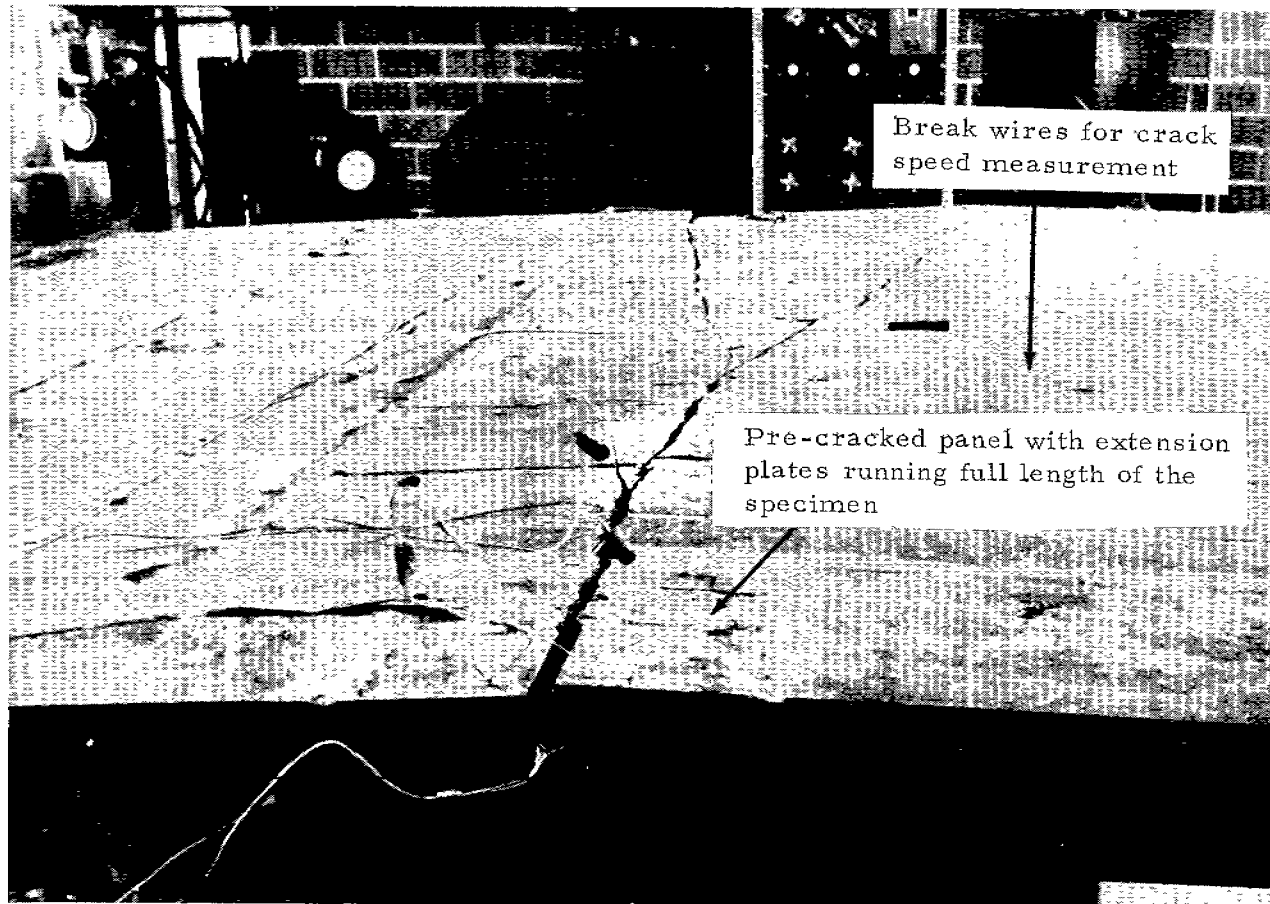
Overall View Of The Fracture - Test B10; Specimen Configuration: 5-1/2" Edge Fatigue Crack In A 120 x 12" Patch. Specimen Has Weld Along The Longitudinal Temperature: +10°F; Fracture Stress: 39,400 Psi On The Gross Section; 41,50 Net.
